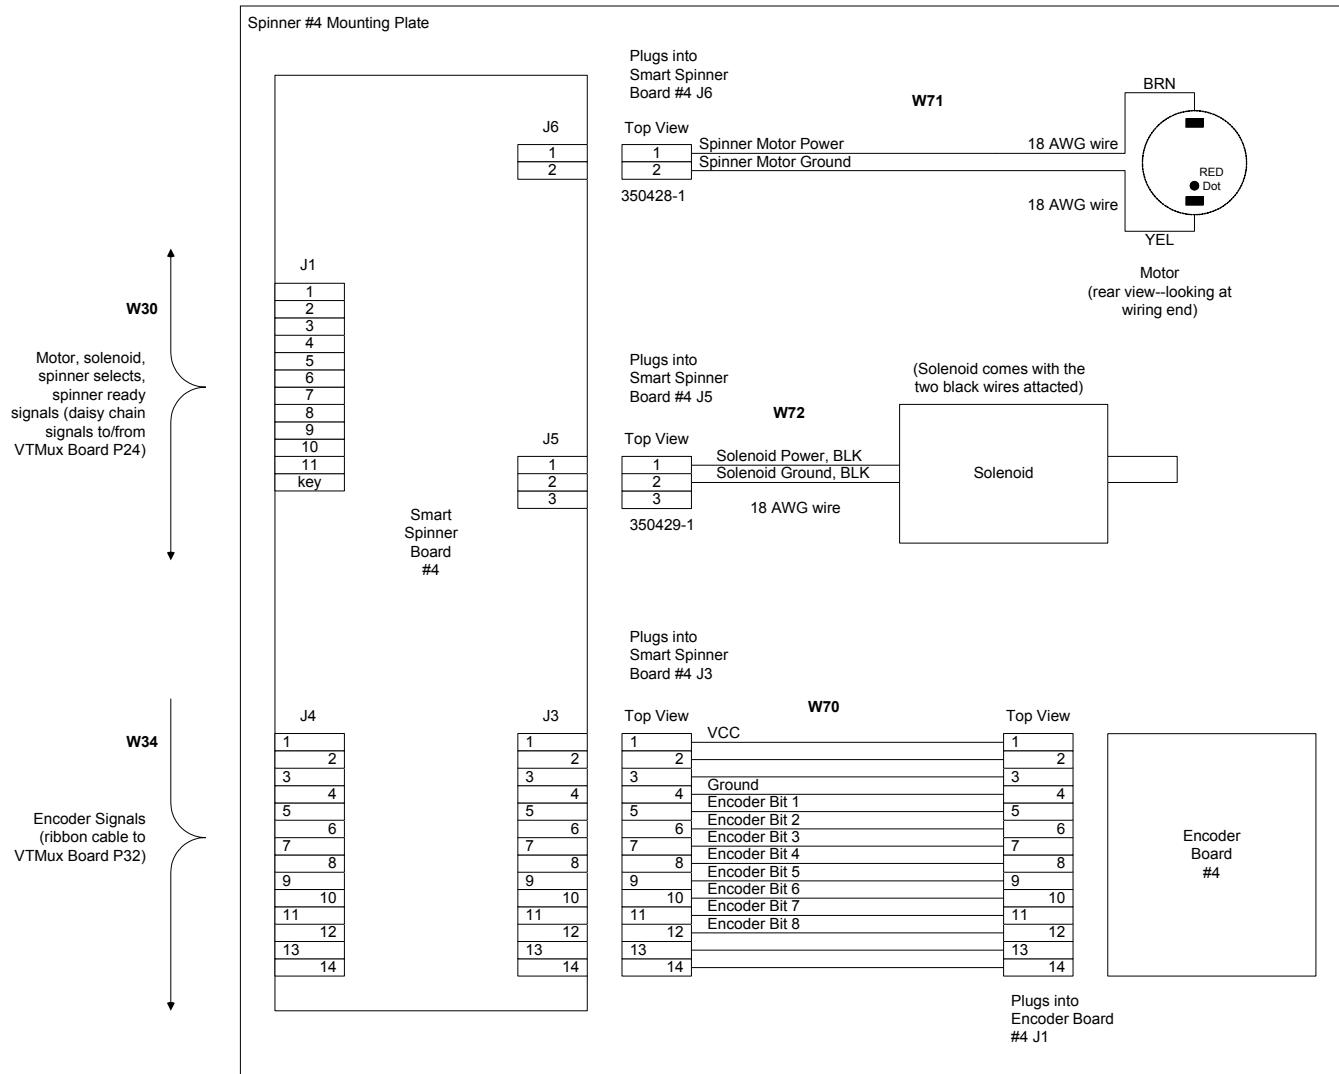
SPINNER #4 SUBASSEMBLY
